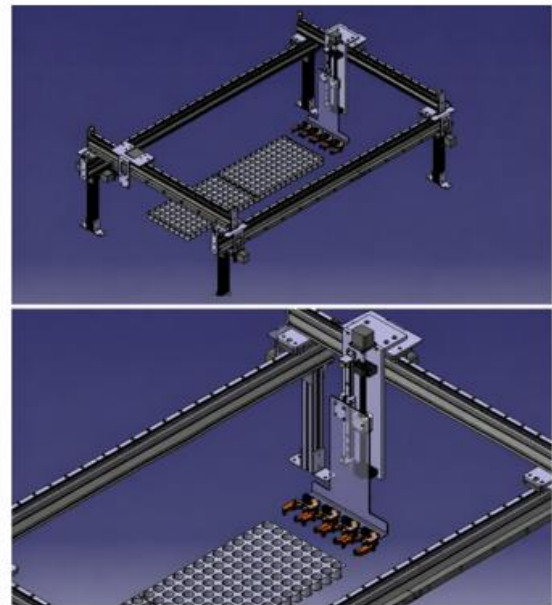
3D CAD configuration of the proposed 3-axis gantry mechanism and end-effector assembly.
